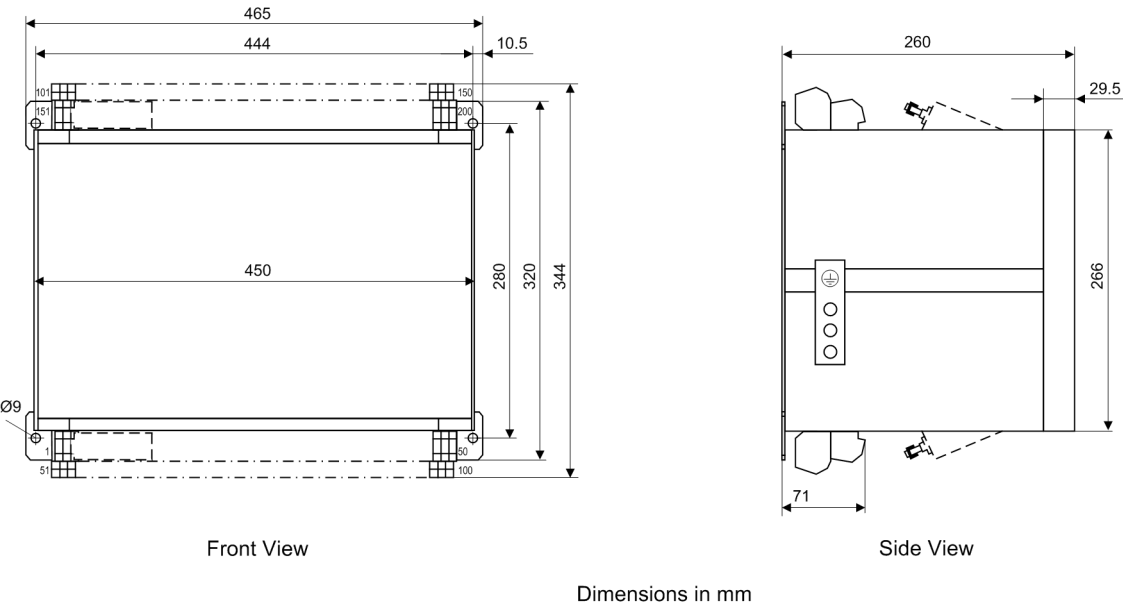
Dimensions of a device for panel surface mounting (size 1/1)
